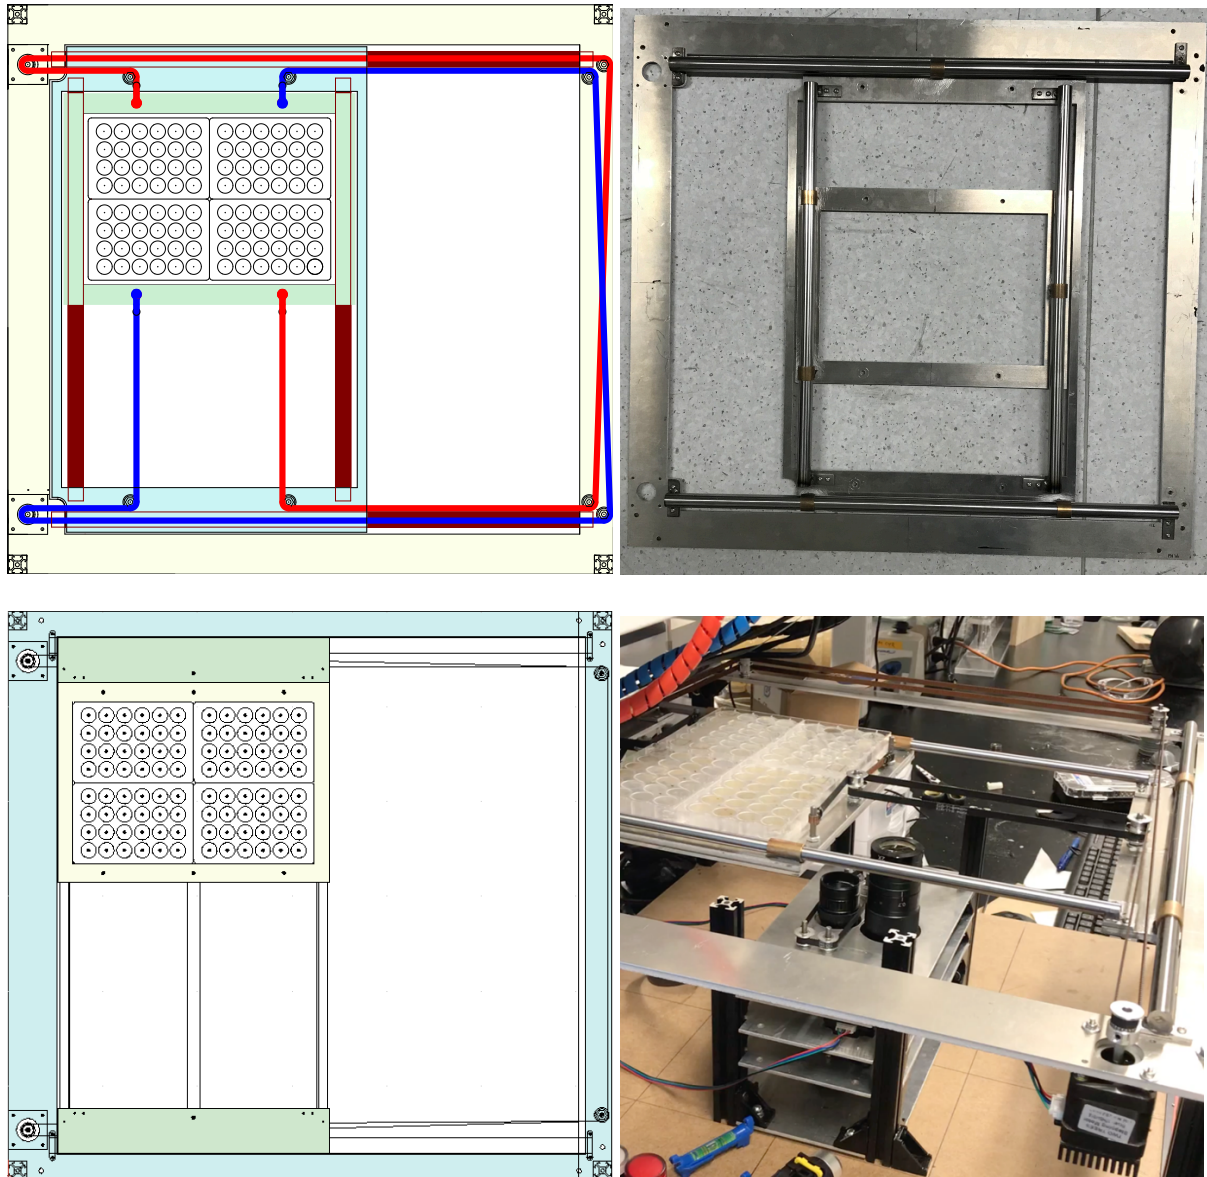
CAD and working prototype for the initial and welded CeSAR stage (above) and final and epoxied (below) CeSAR stage dimensions and motorization.
